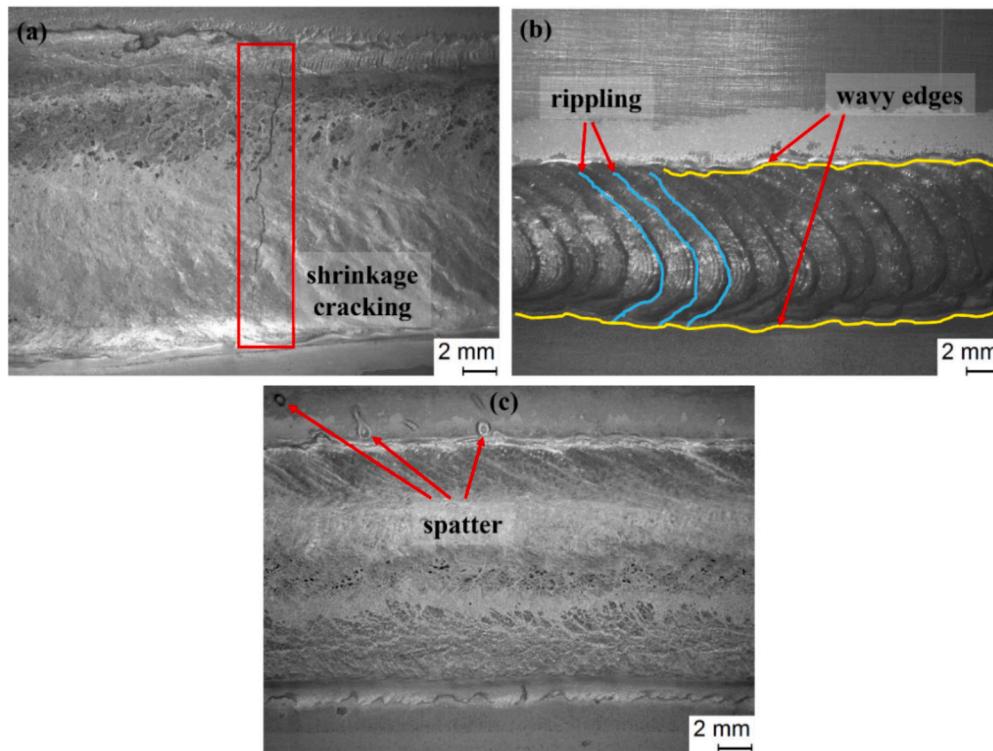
Defects in weld-brazed joints observed in different samples listed in Table 2: (a) S13, (b) S16, and (c) S10.
